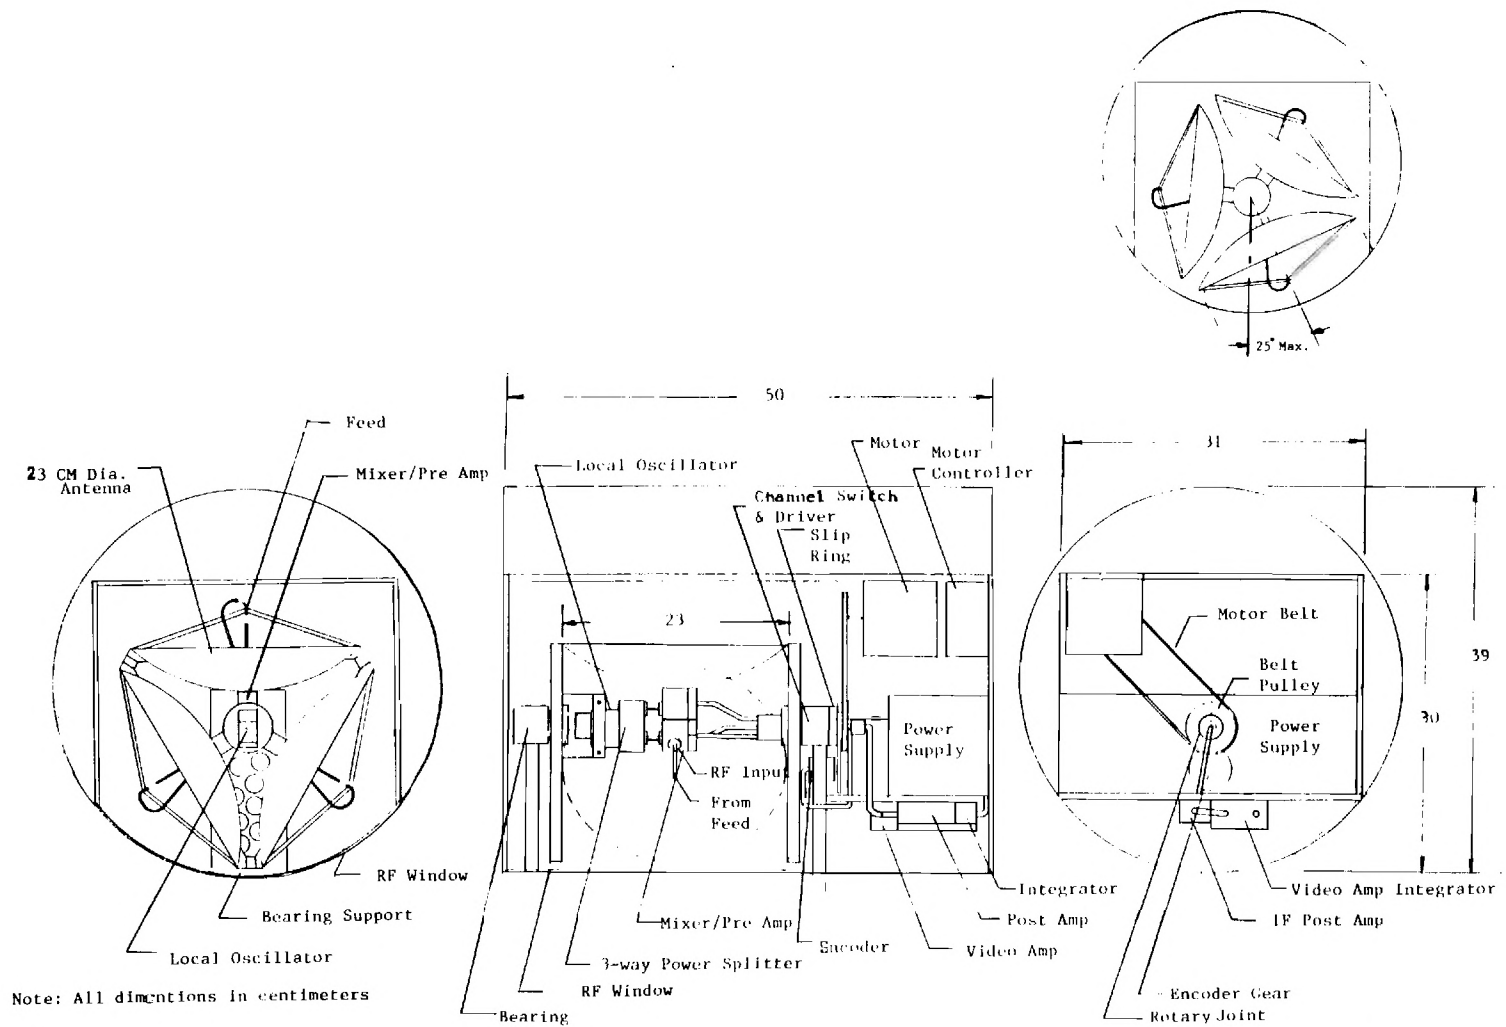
Millimeter Wave Sensor Mechanical Configuration Drawing.
